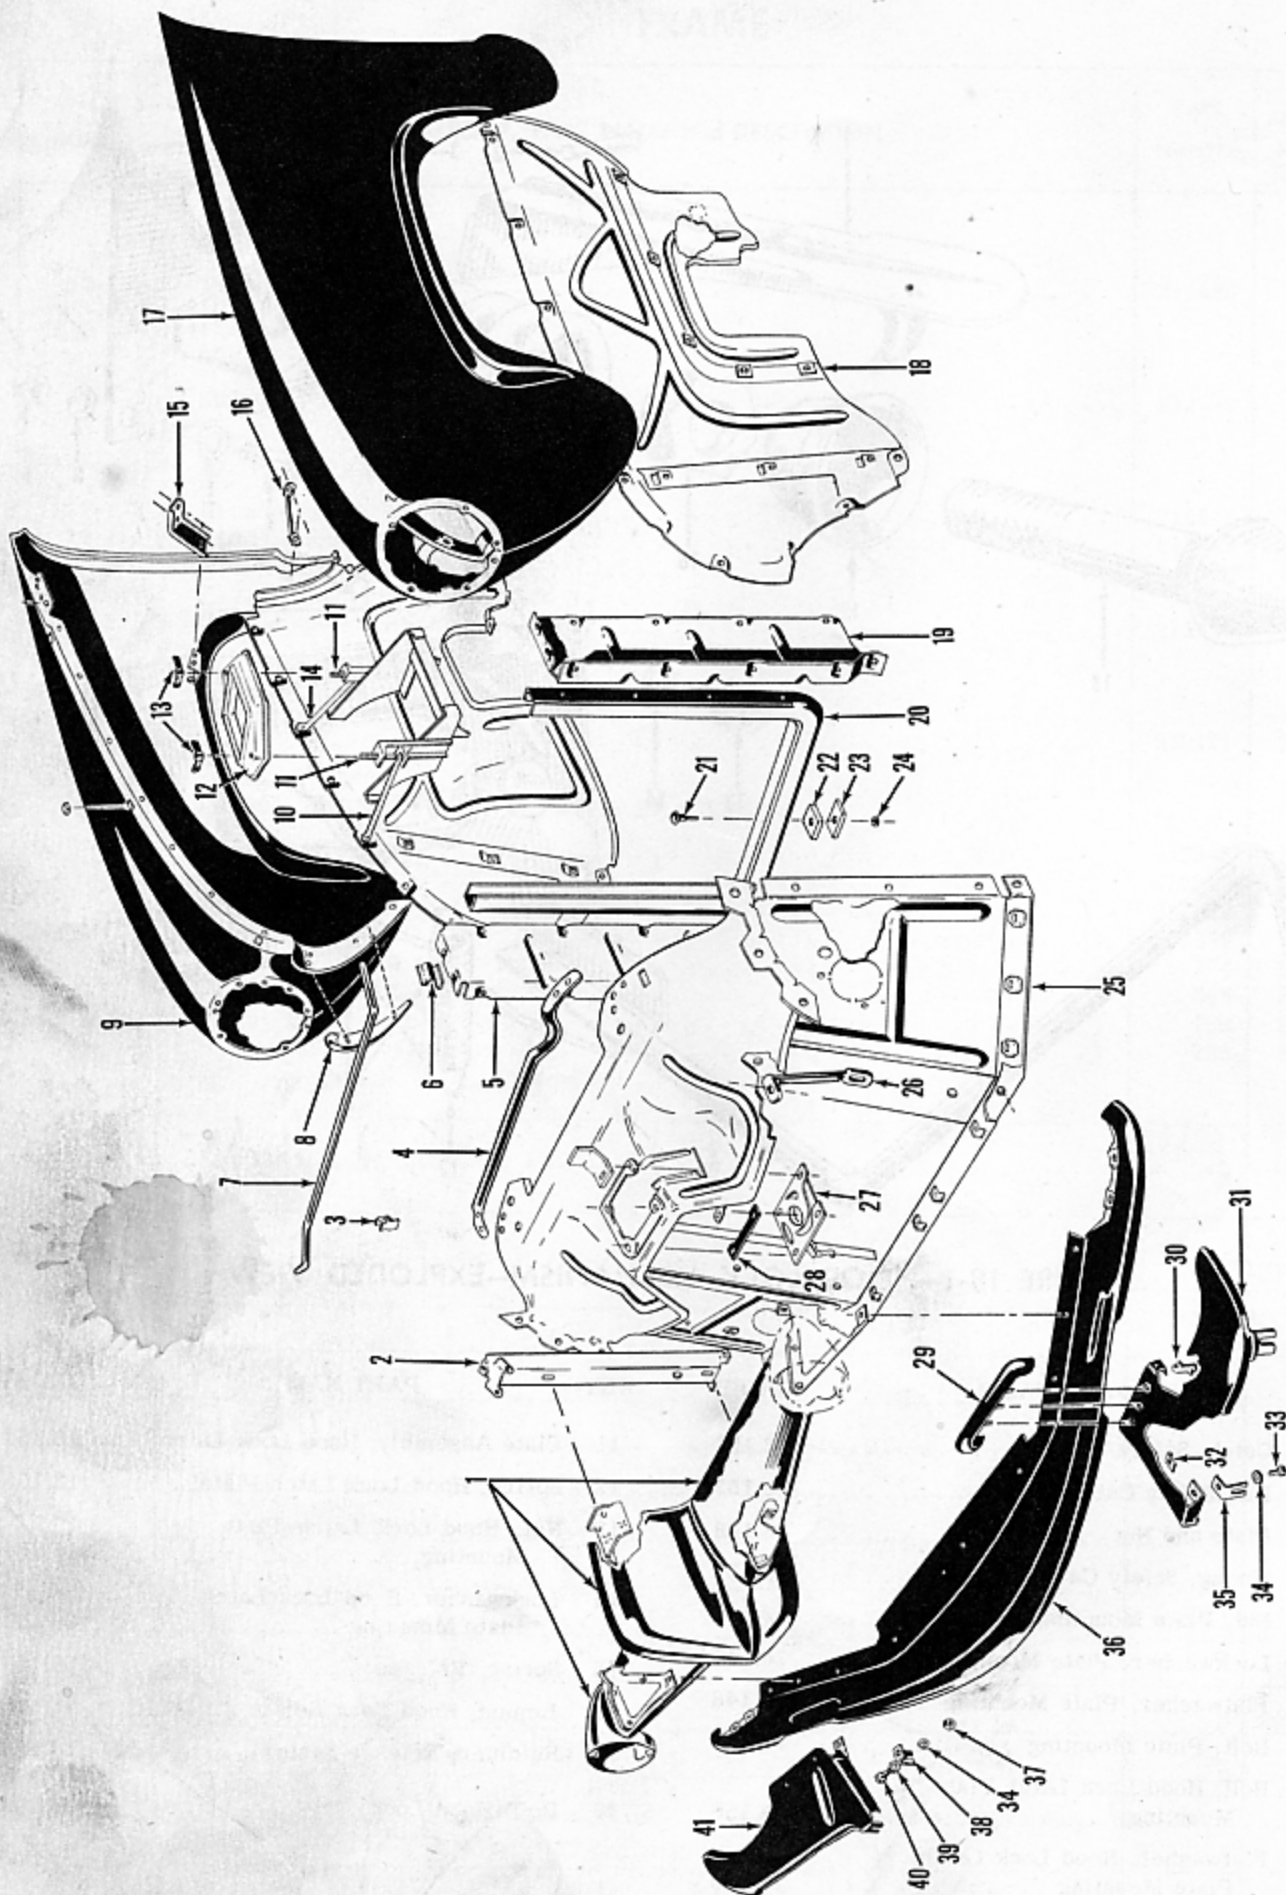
FRONT END SHEET METAL—EXPLODED VIEW
